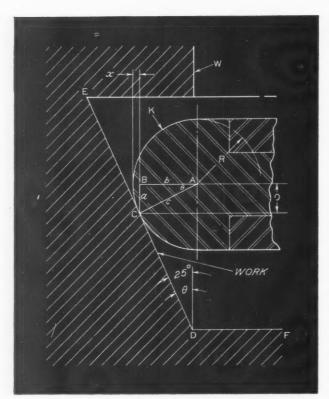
Diagram illustrating method of making calculations required in designing, constructing, and using gage shown in Fig. 1
